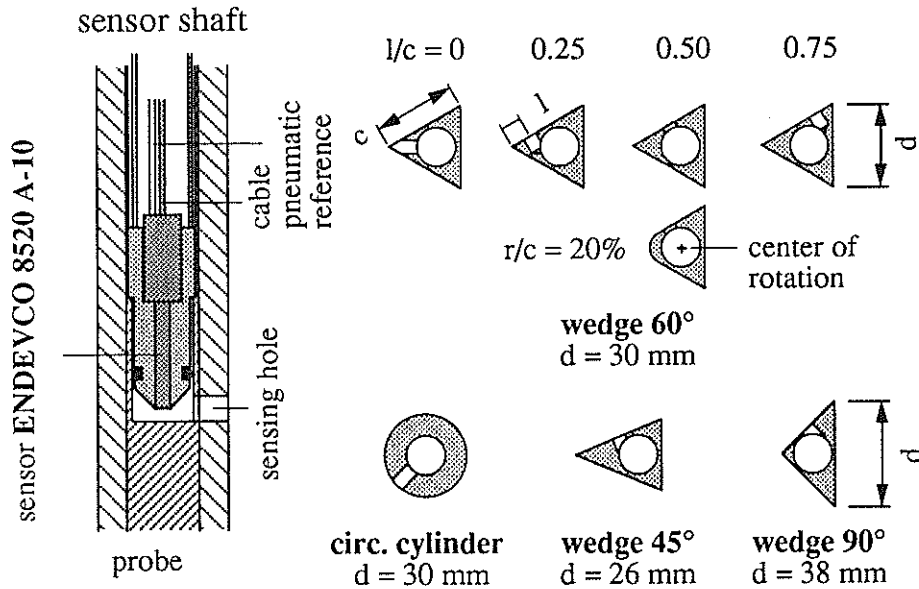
Assembly of sensor-shaft and probe geometries tested
